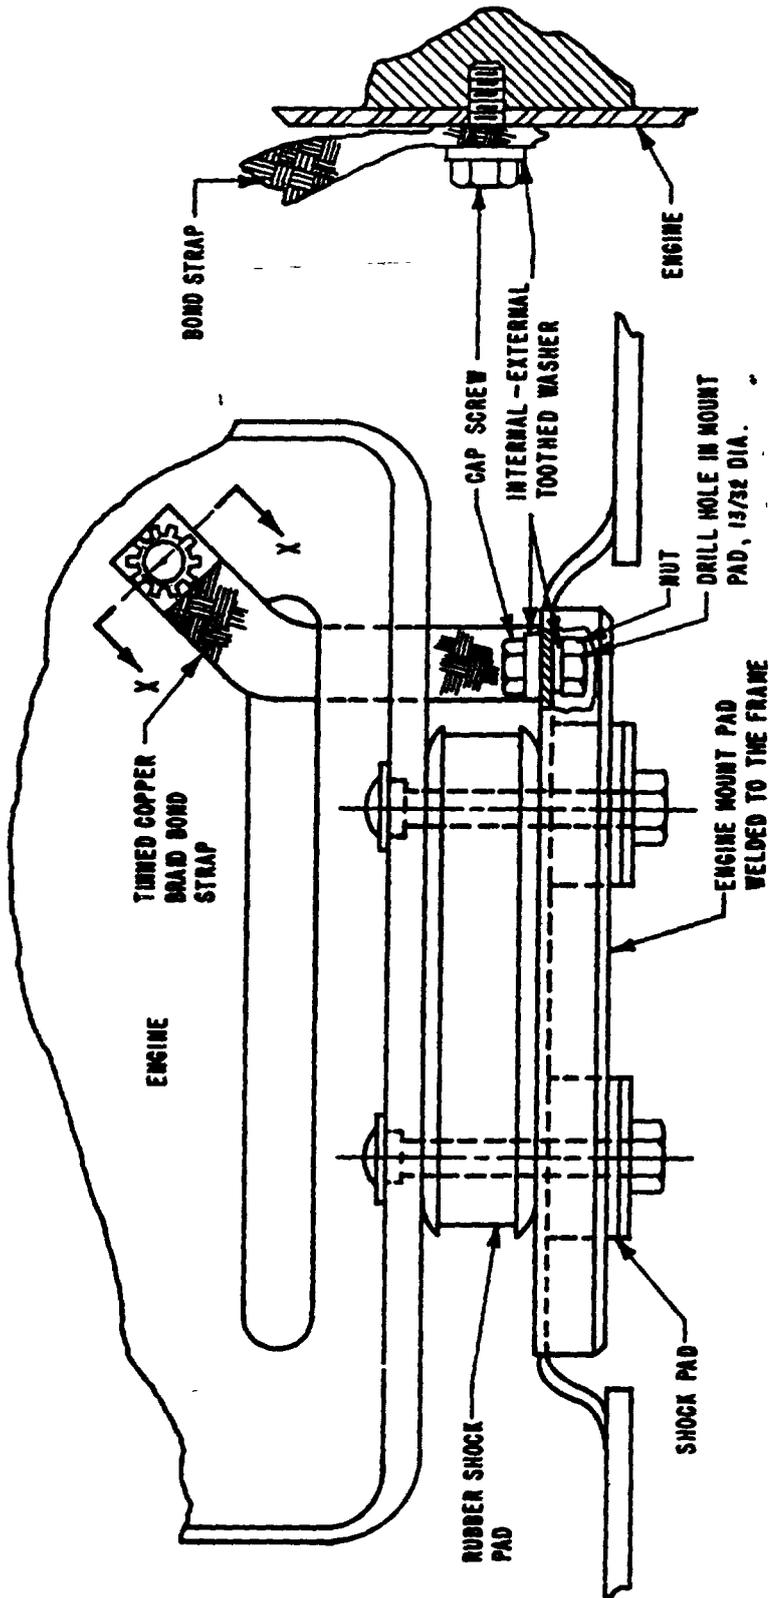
BONDED ENGINE SHOCK MOUNT - FRONT
